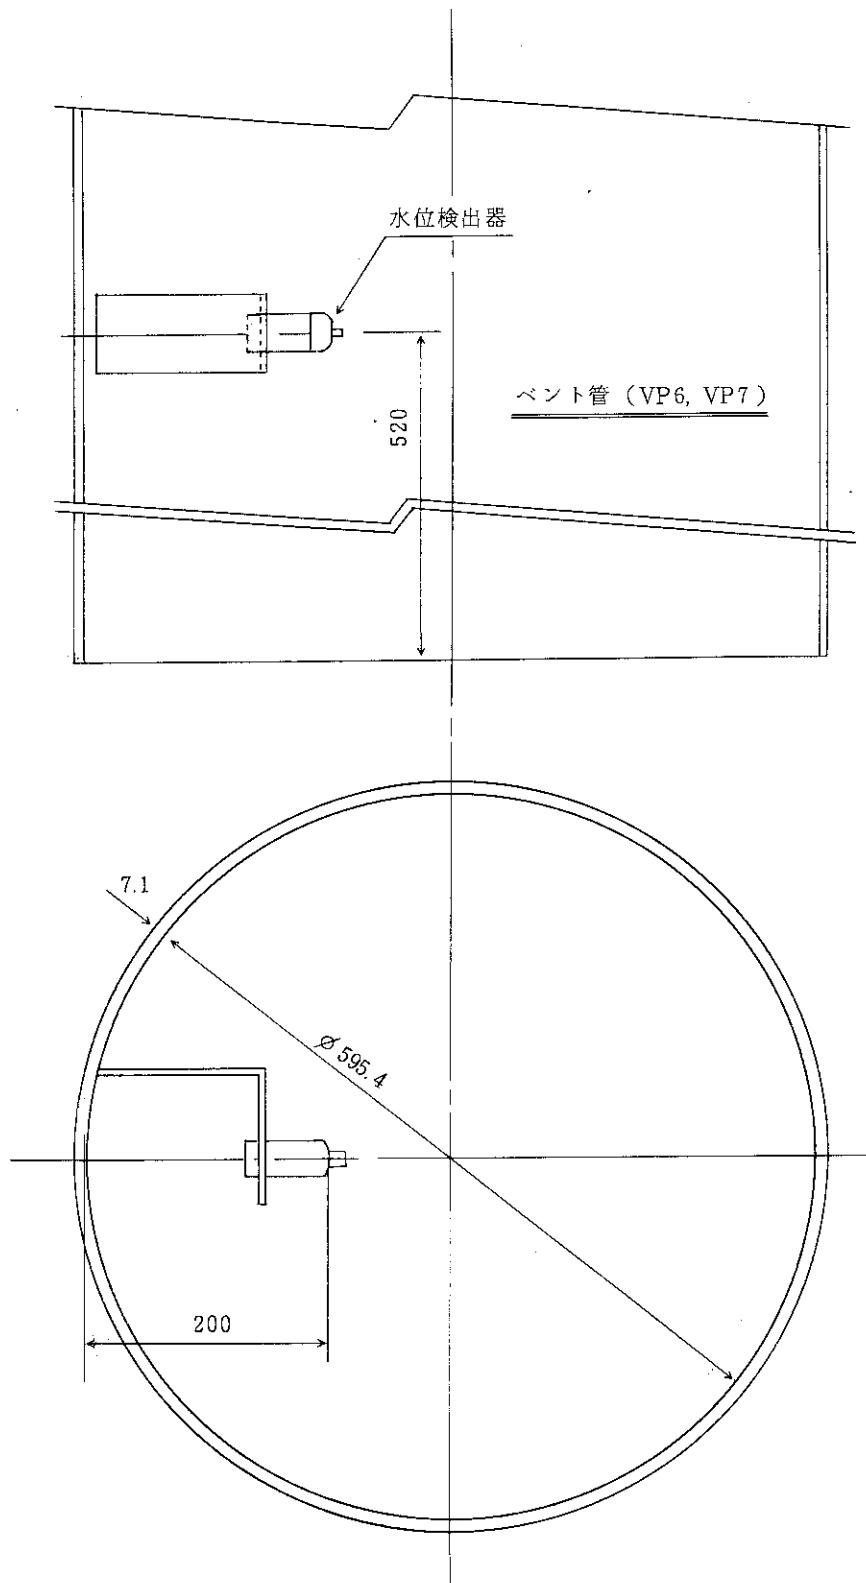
Schematic of installation of water level probes on vent pipe outlet
